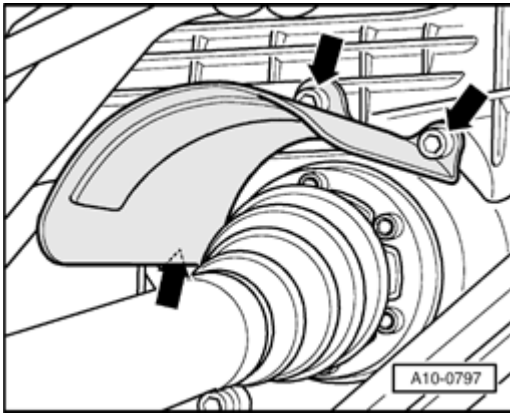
Removing Heat Shield Above Right Side Drive Axle
